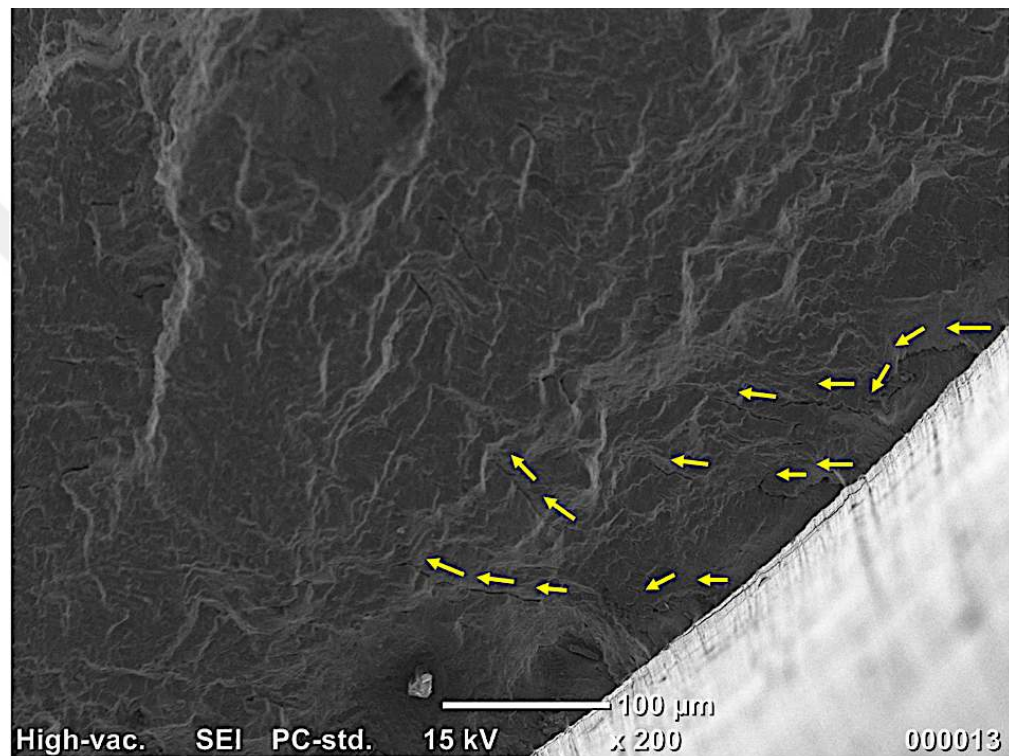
Alpha case layered fatigue specimen fracture surface
